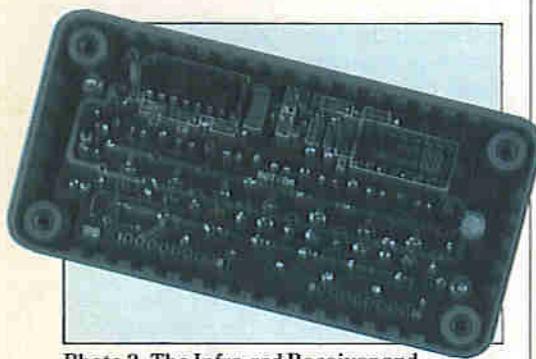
The Infra-red Receiver and Switch Unit PCB fitted into its box.
